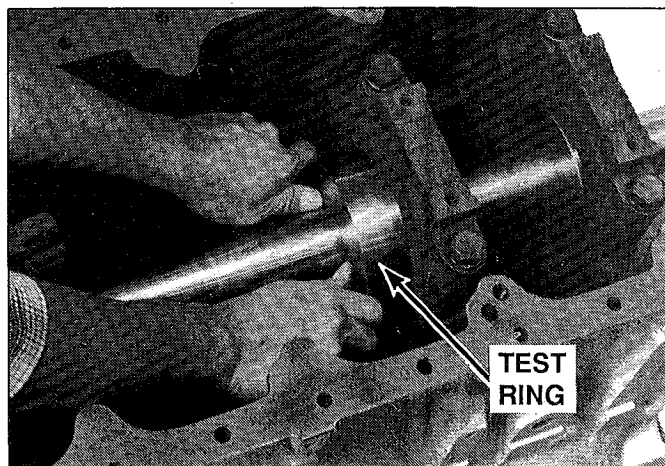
MAIN BEARING BORE ALIGNMENT TEST
